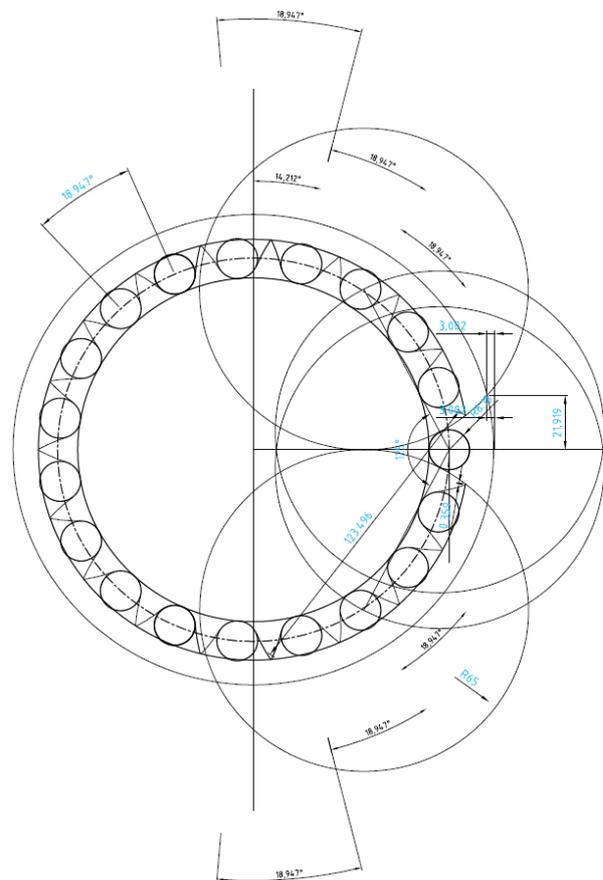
Drawing sprocket with 19 teeth used to design processing program O0158 [10, 11, 12, 13]
